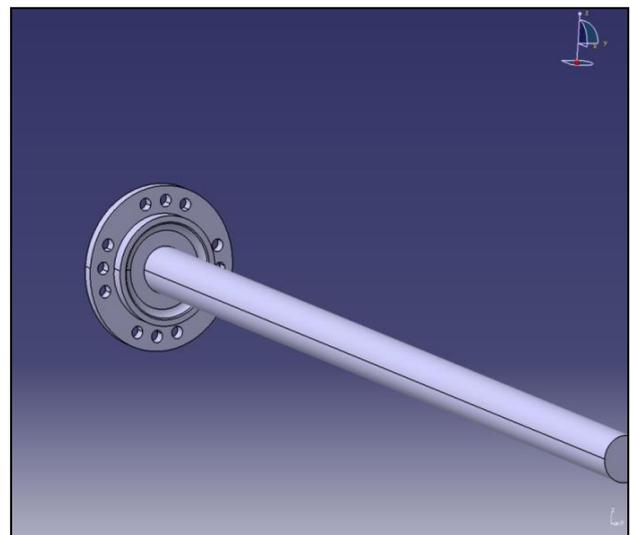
CAD model of rear axle shaft drawn in CATIAV5
